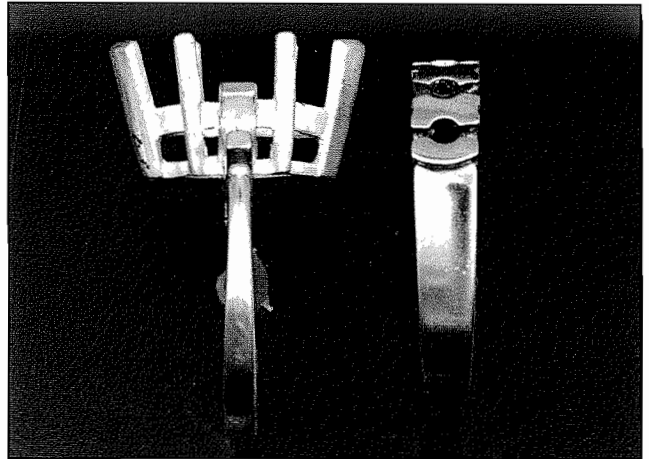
Assembled Pt-Ir alloy pieces after soldering and prior to cleaning
